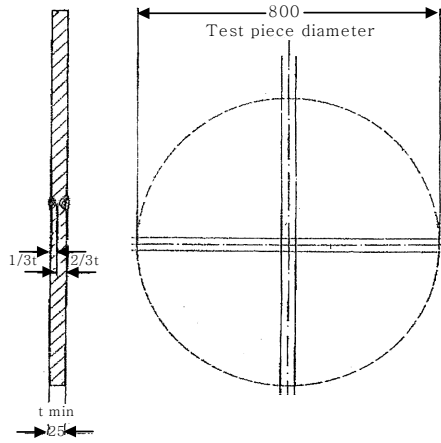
Typical joining configuration for explosion bulge test weldments in underwater
